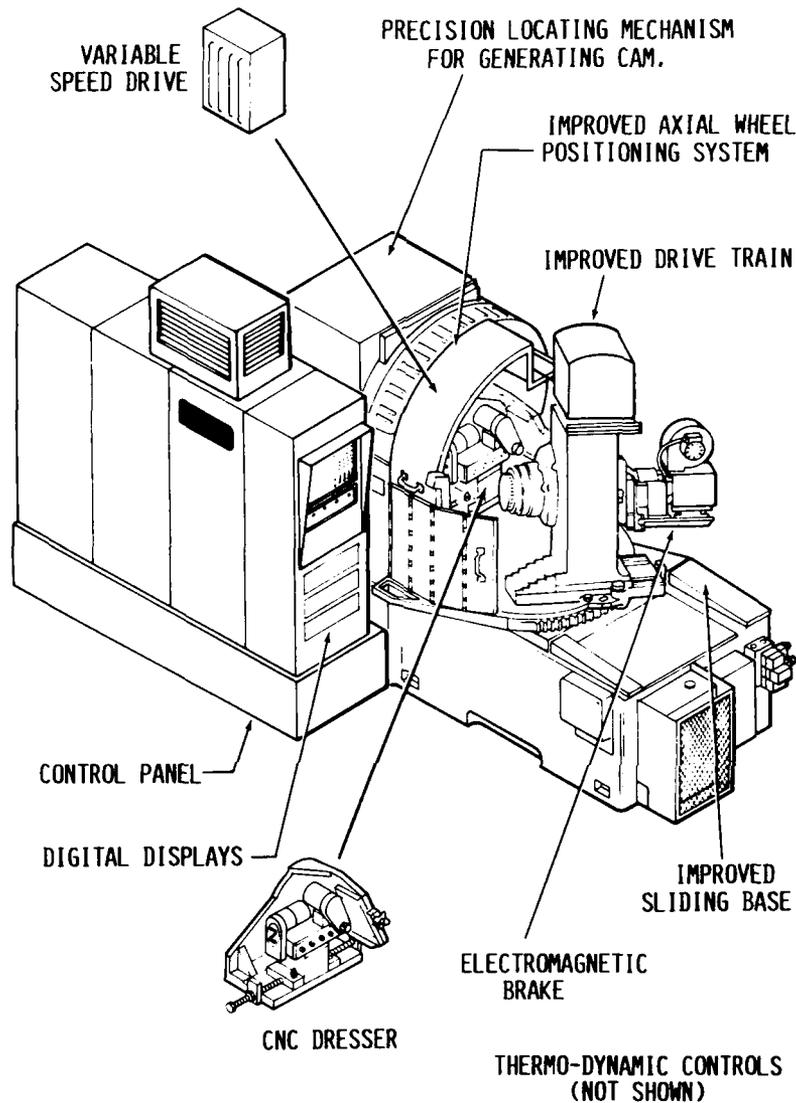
Modified Gleason Gear Grinding Machine
